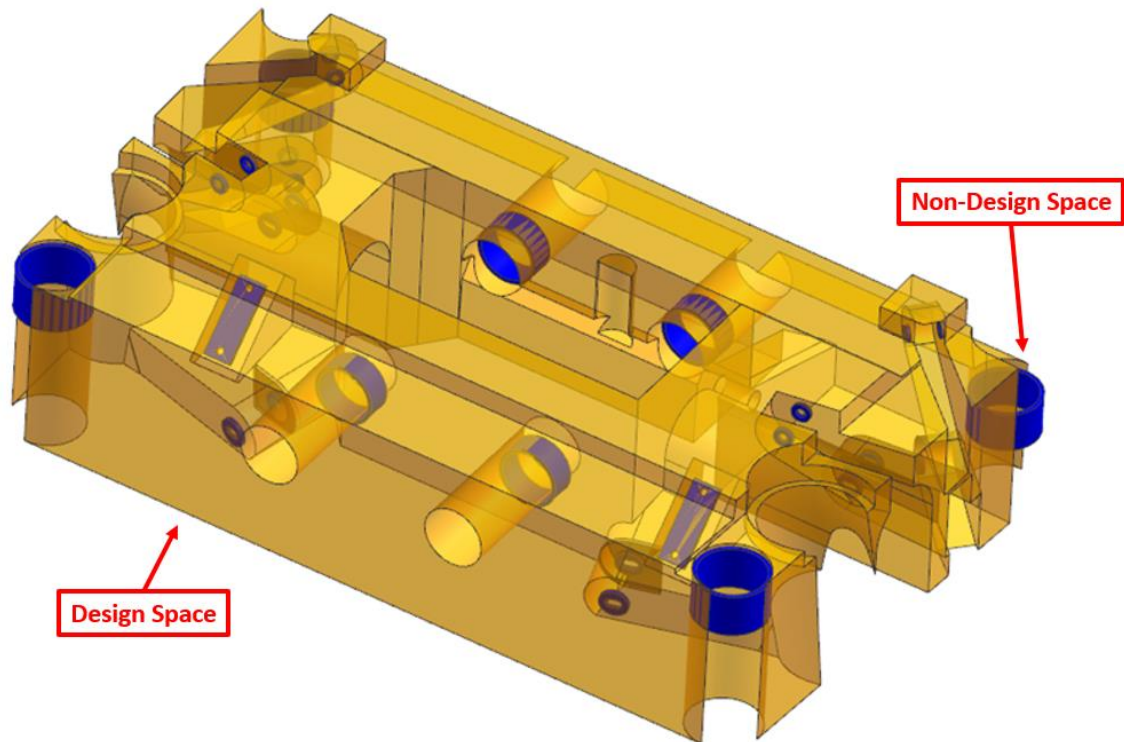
Completed CAD assembly, with the design space in orange, and non-design space in blue
